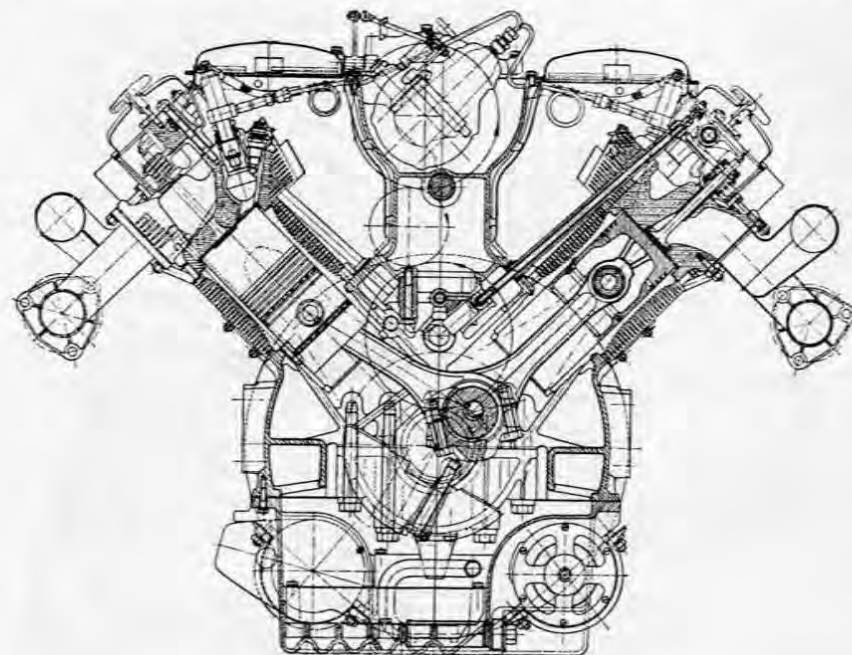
Transverse section of the eight-cylinder Deutz engine.
